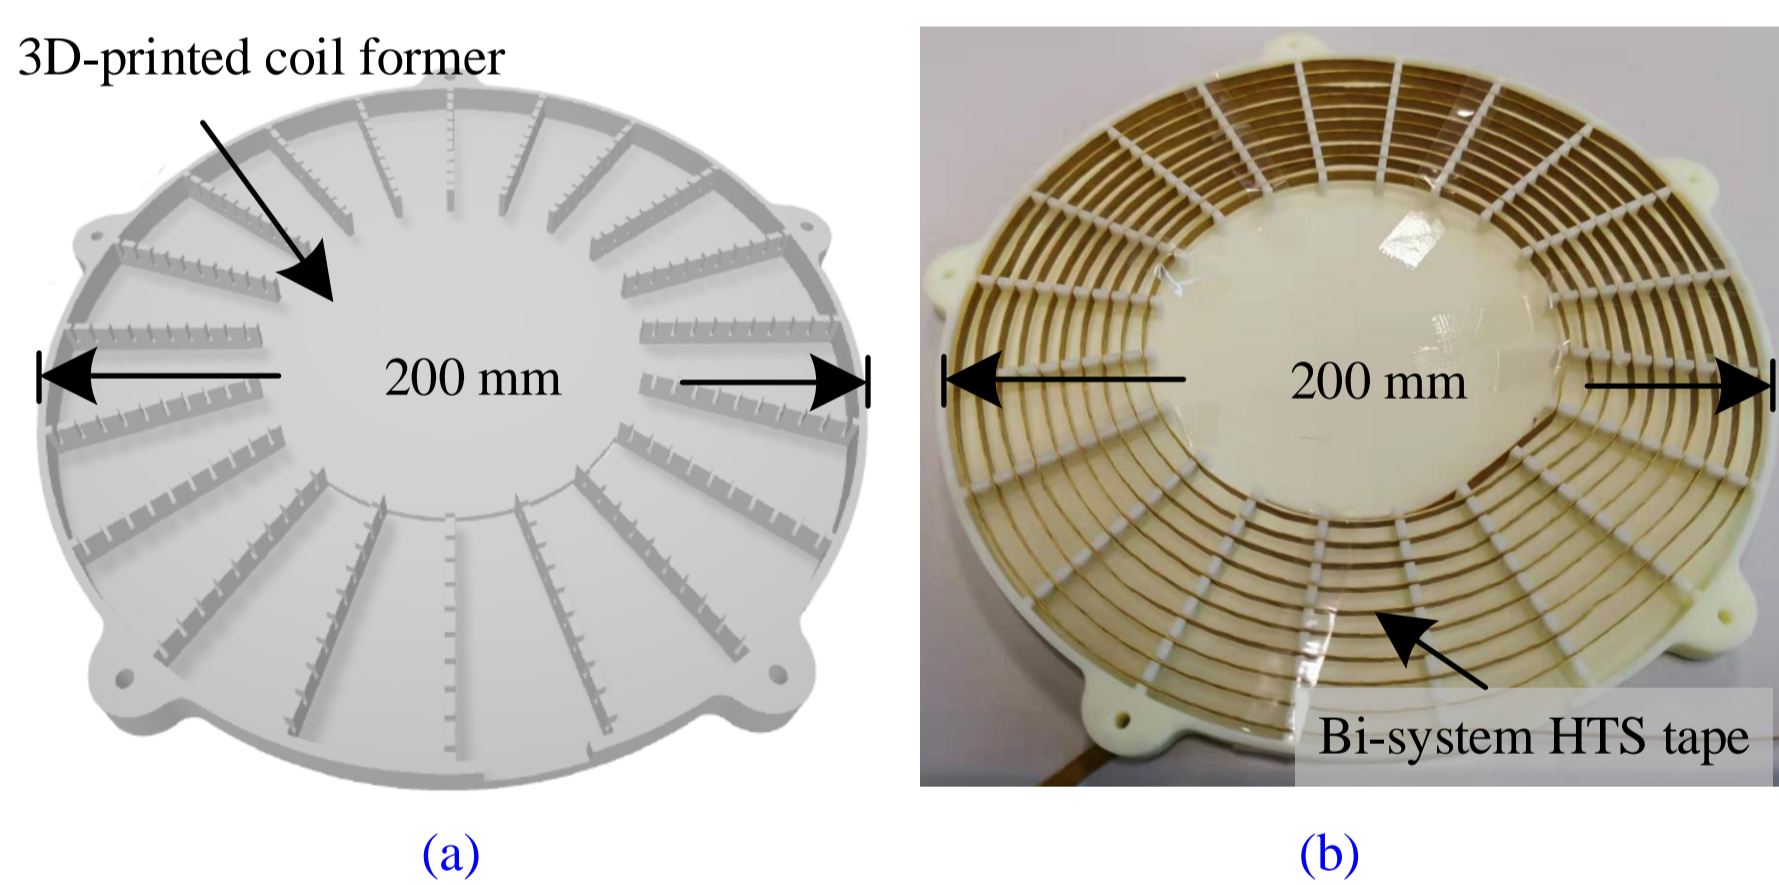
Coil design for HTS-based wireless charging system. (a) 3D printed coil former. (b) Practical fabrication.
